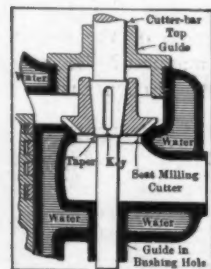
Section of a cylinder through a valve, showing a cutter bar in place and a milling cutter adjusted to remove metal from the valve seat
